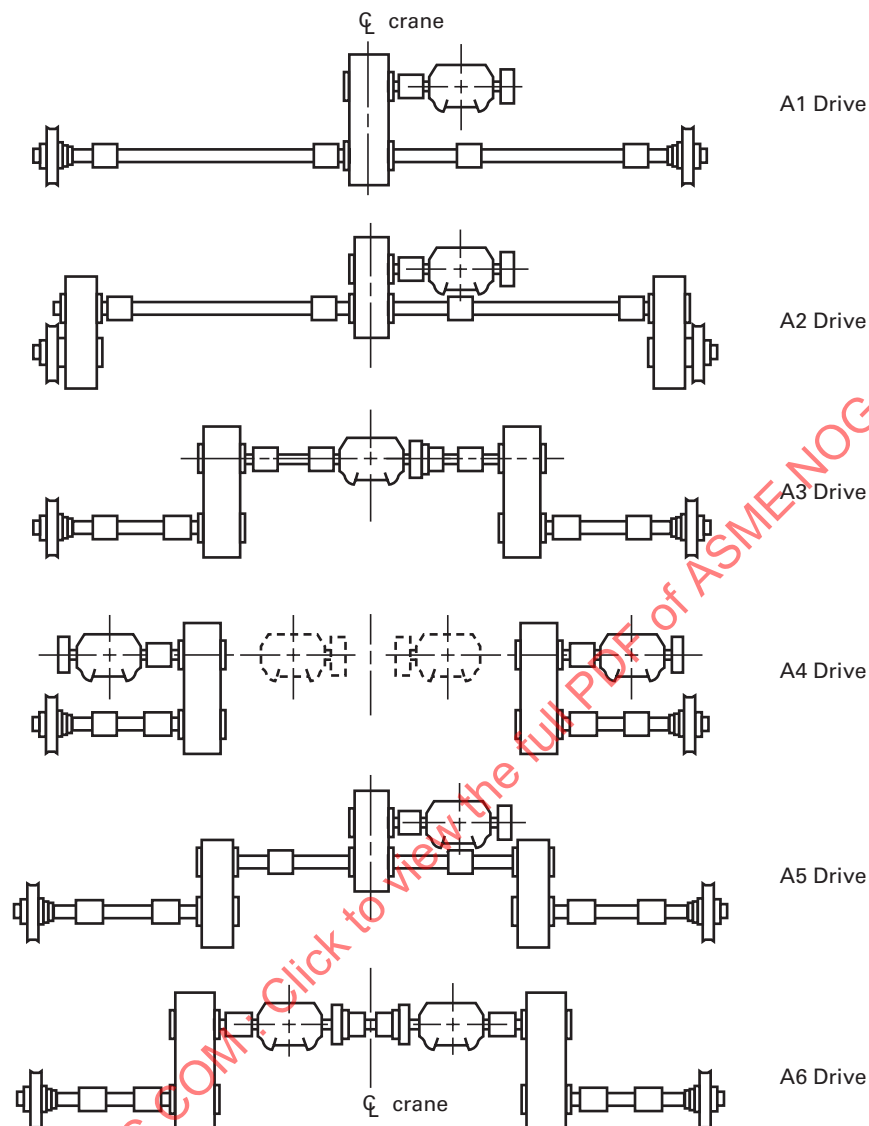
(a)-1 Arrangement of Crane Bridge Drives
